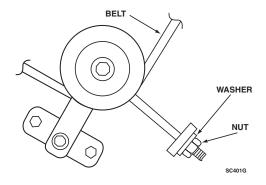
Cutter Deck Belt Adjustment R.H.
